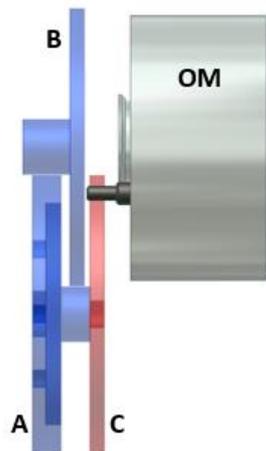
Oscillatory motor drive (OM): gear and the motor; A – outer spur wheel with interfaces to the hinge axis, B – mid toothed spur wheel with pinion, C – pinion with escapement, special toothed wheel, OM – oscillatory motor with four coils and pins engaged with the escapement wheel.
